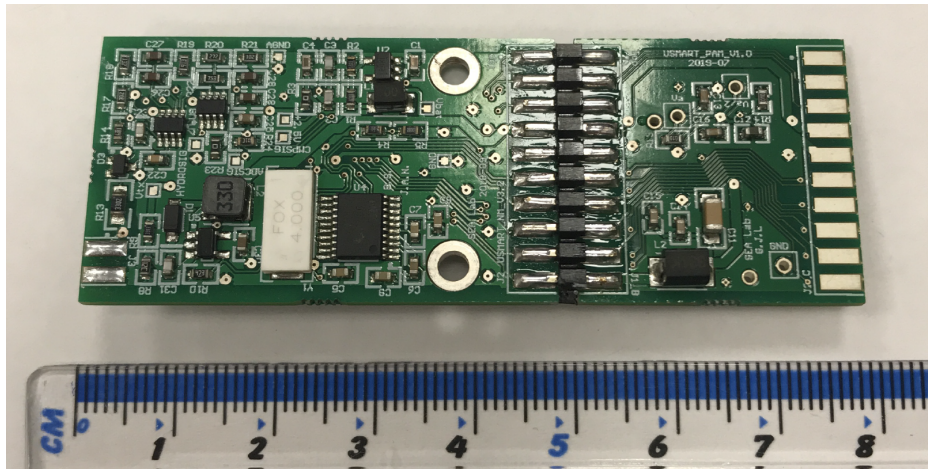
Assembly - NMV3 PCB (Left) and PAM Add-On PCB (Right)
